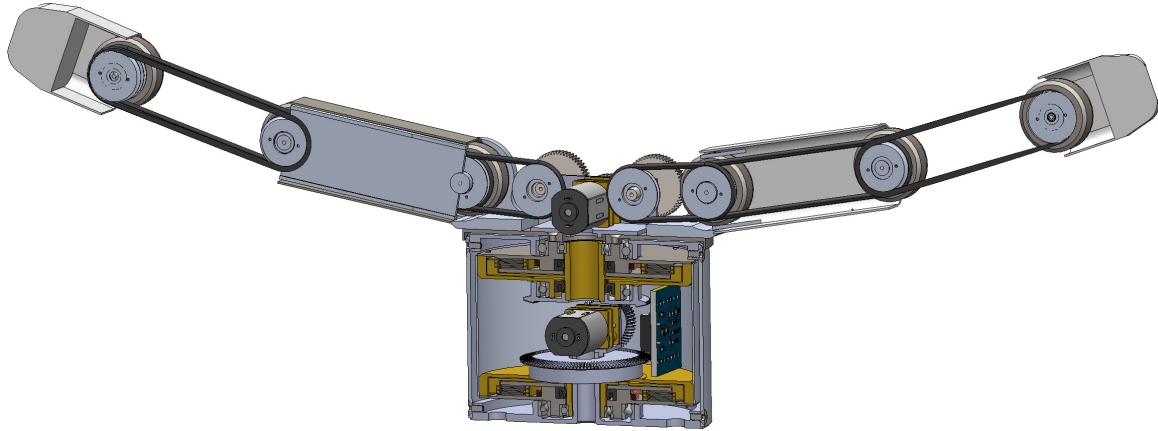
Design concept of a compliant robotic gripper with belt transmission actuating clutches rotating in the same direction (cross section view)
